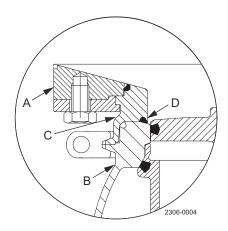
Converting from SMP-TO valve to Unique-TO valve in tank flange
